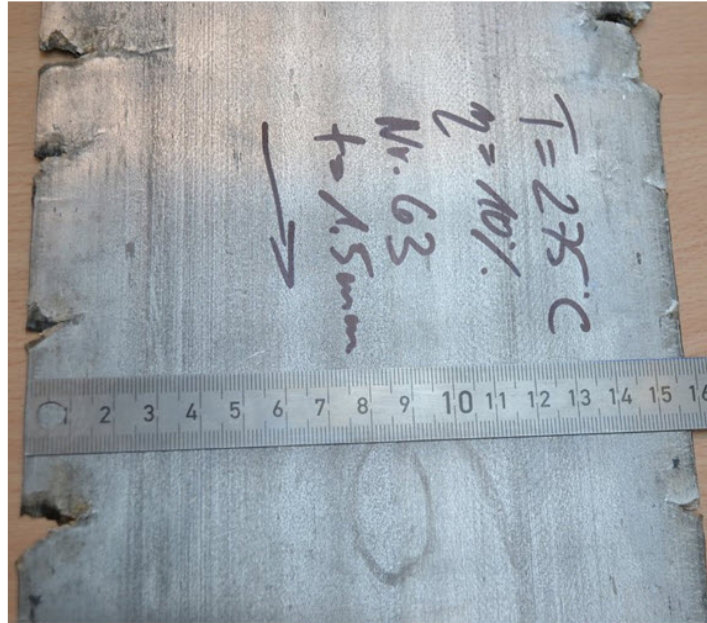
Enlarged view of the edge cracks for sheet 63; typically, damage was limited with crack lengths of about 5 to 25 mm
